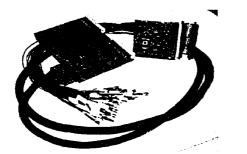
Speed-wire daughterboard/motherboard assembly with interconnecting cables
